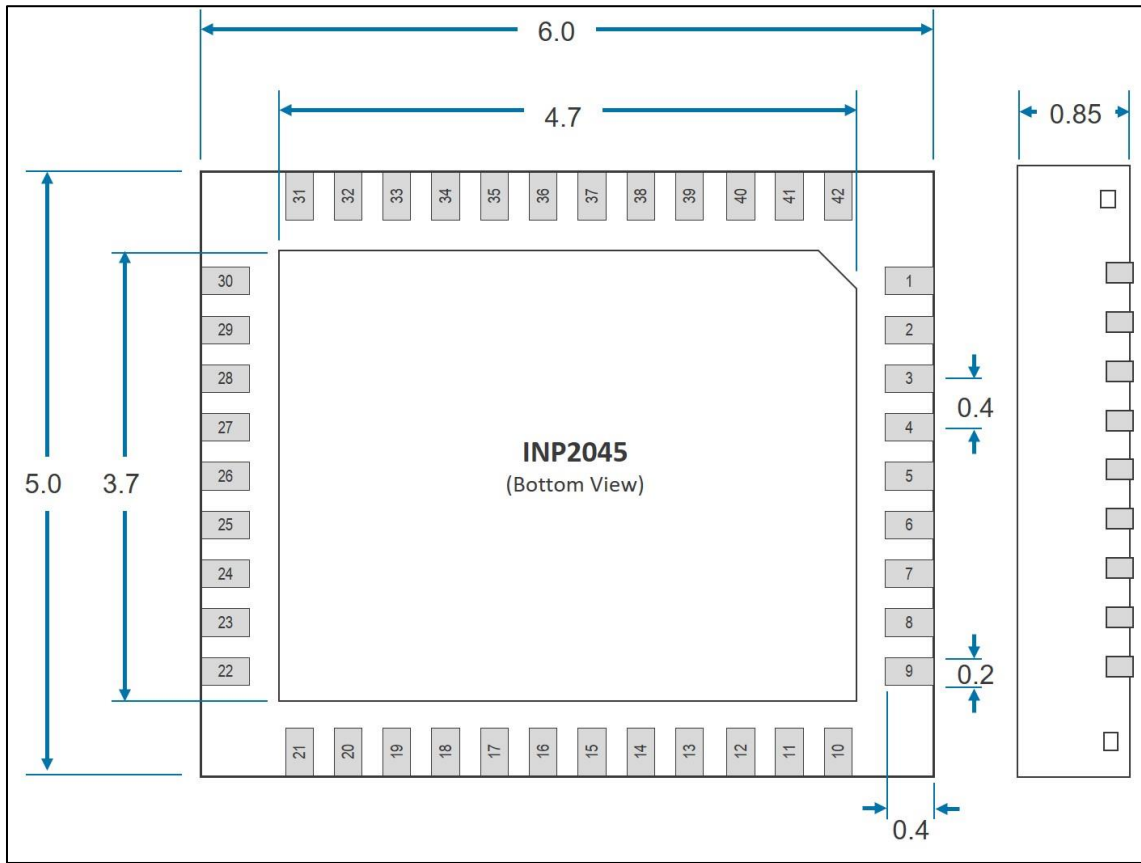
INP2045 SoC Chip Pin Out and Dimensions
